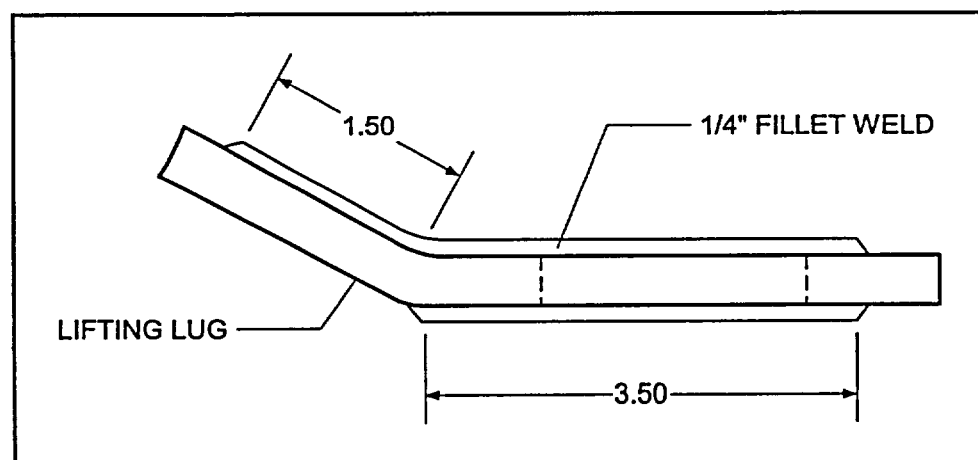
Lifting Lug Weld Configuration
